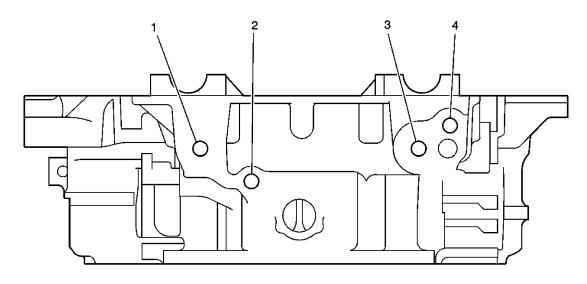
Cylinder Head - End - Rear View Courtesy of GENERAL MOTORS CORP.
